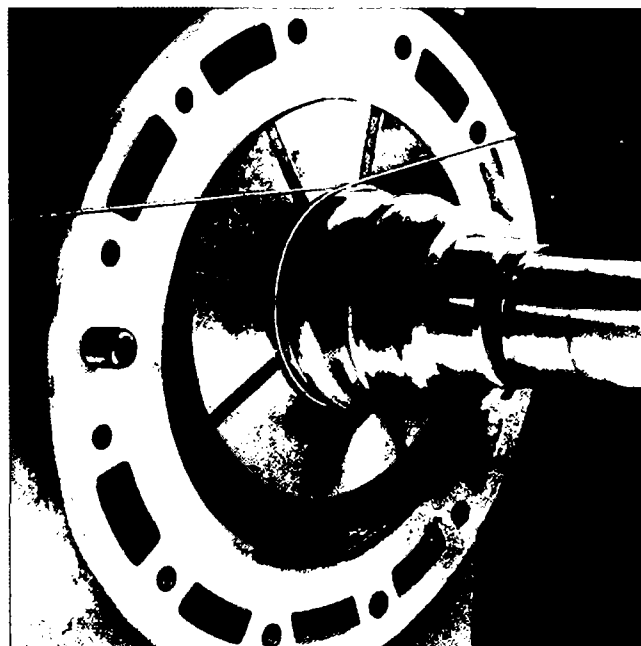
Compressing seal ring prior to replacing cylinder head.
